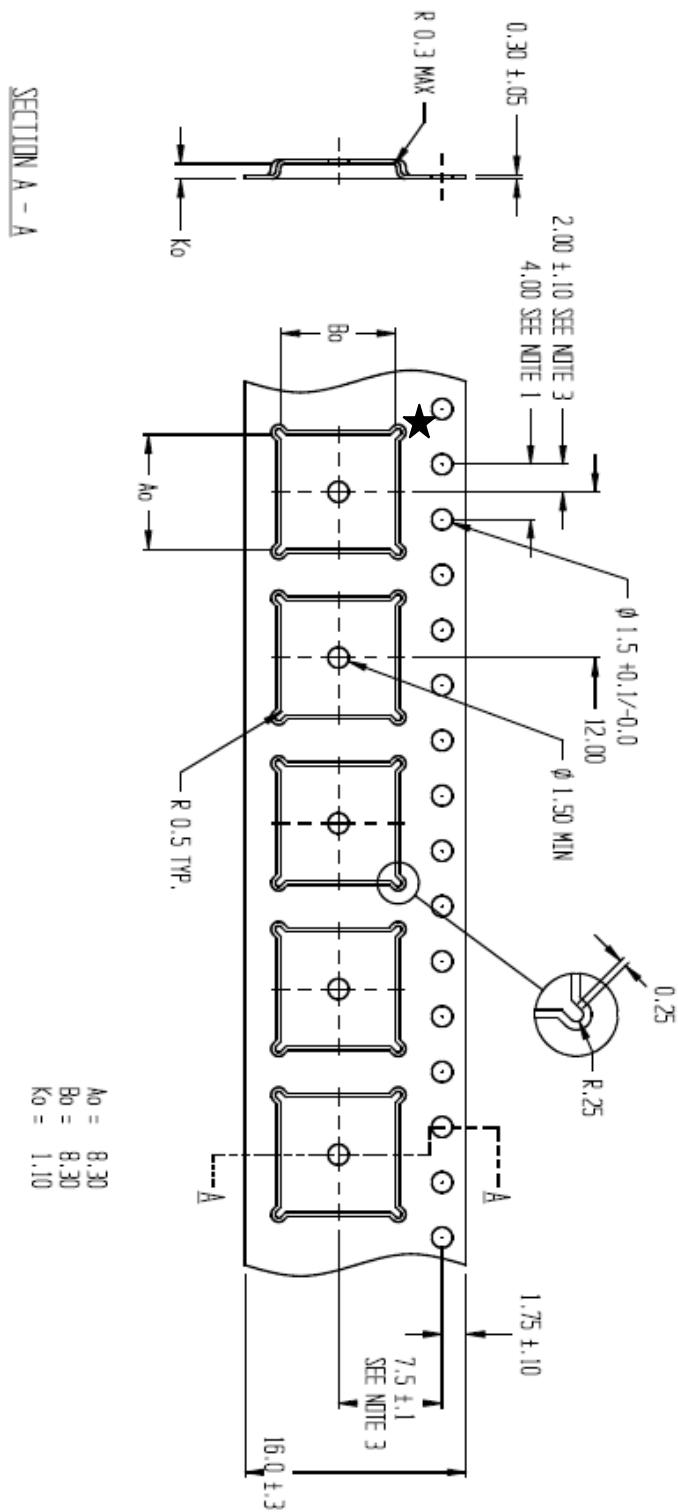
FT232HQ Carrier Tape Dimensions
